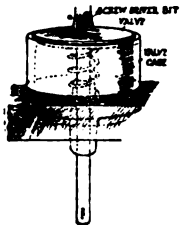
Cage type of valve. To grind this type, remove cage and valve and grind in same manner as the poppet valve, see fig. 3, page 90, fig. 4, page 94.
